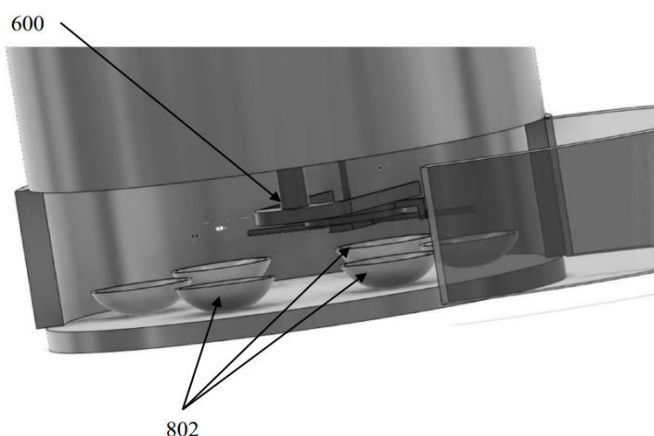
illustrates a perspective view of the third cleaning assembly adapted to clean curved utensils placed in a chamber of the dishwasher.
